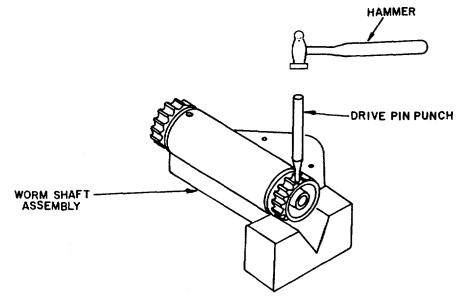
Installing a Tapered Pin In a Wormshaft Assembly
